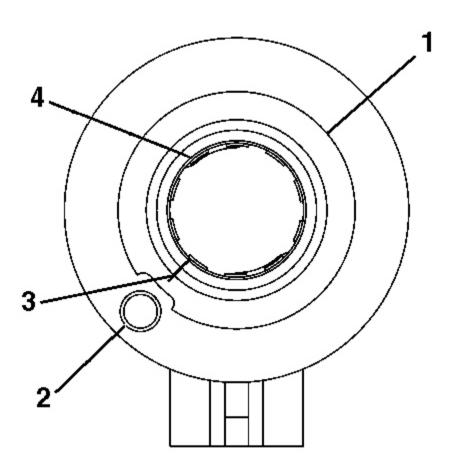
Steering Wheel Position Sensor Rotor Flange Cuff, Centering Pin Hole, Alignment Mark & Foam Ring & Proceed To Step 21
